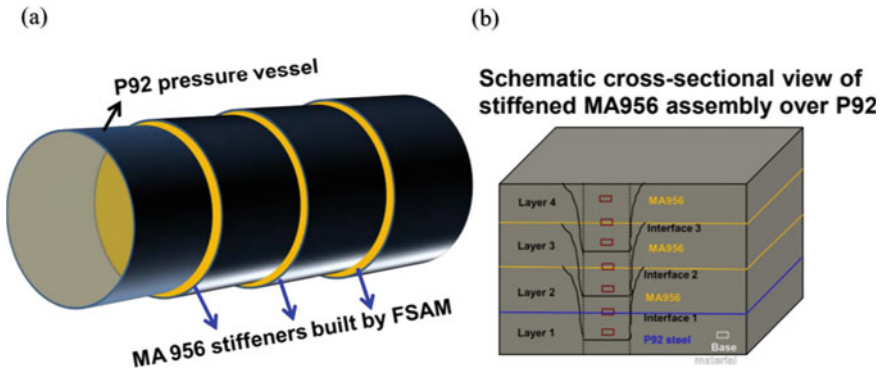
a MA956 stiffener rings on P92 steel, b cross-sectional view of stiffened MA956 assembly over P92 [65]
